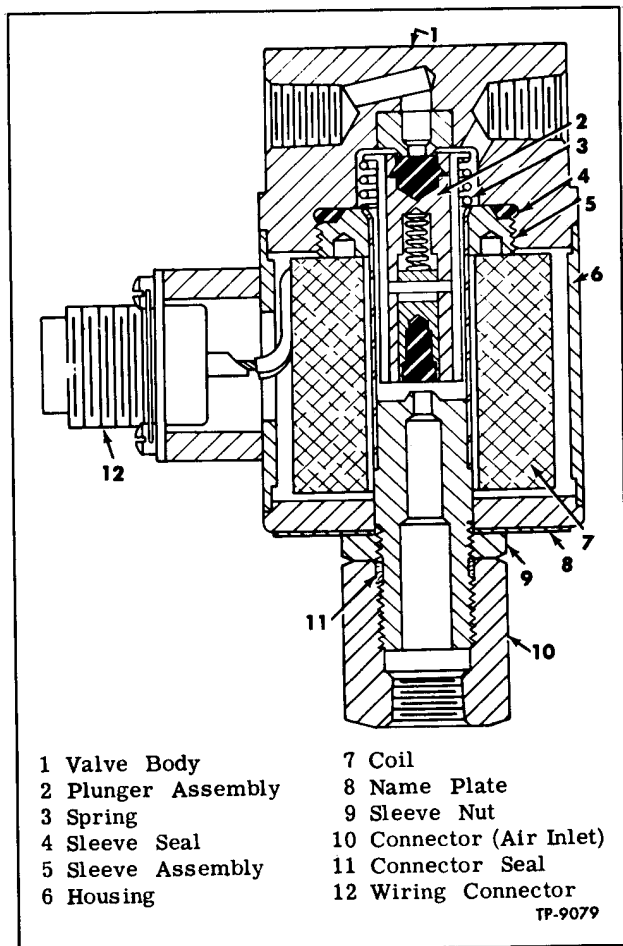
Engine Stop and Fast Idle Solenoid Valve
